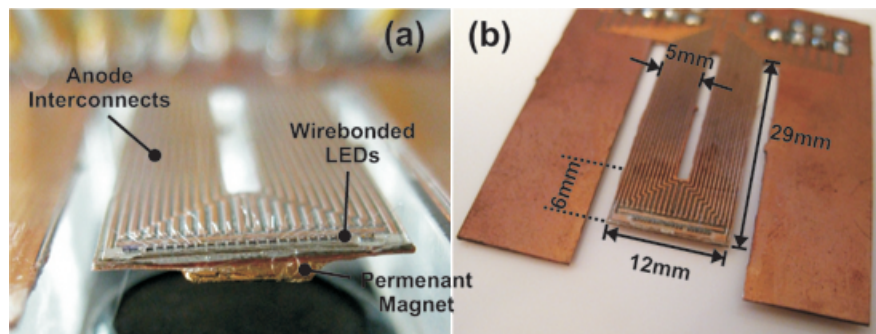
(a) Fabricated device, a close-up view. (b) Device picture with dimensions.
